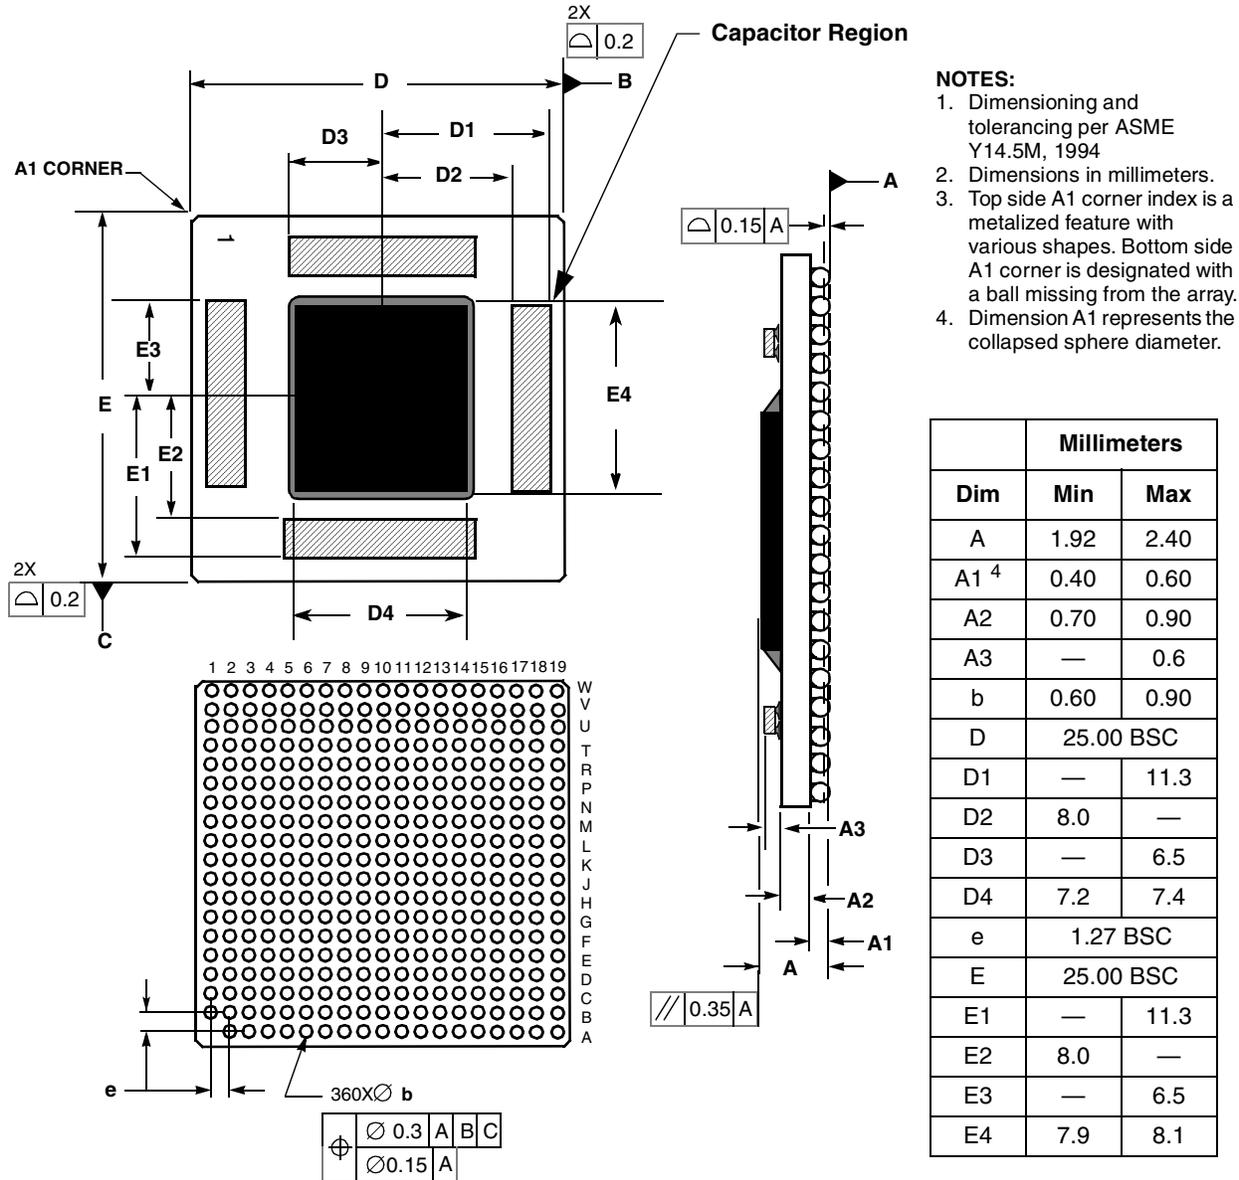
Mechanical Dimensions and Bottom Surface Nomenclature for the MPC7448, 360 HCTE RoHS-Compliant BGA Package
